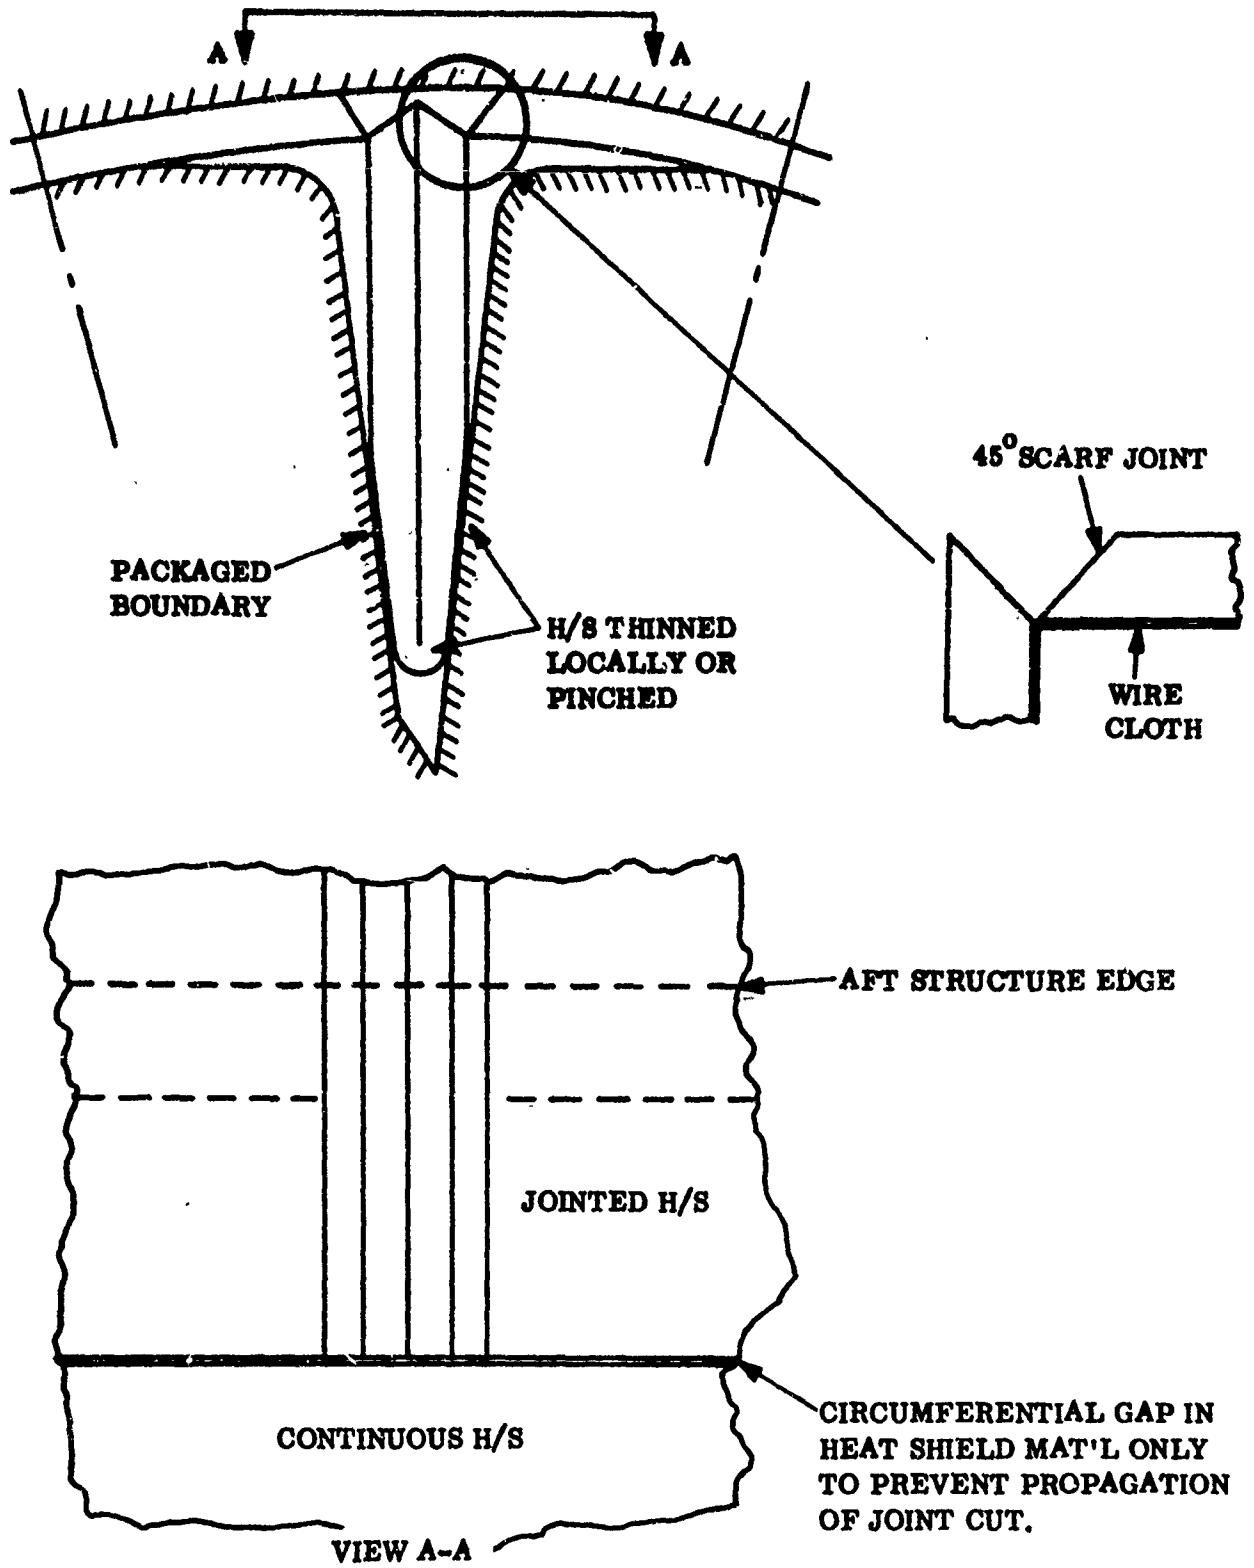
Alternate Approach for Aft End Packaging of Heat Shield by Thinning or Compression
